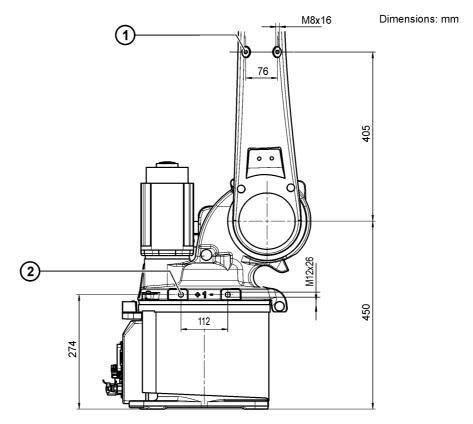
Fastening the supplementary load on the link arm/rotating column
